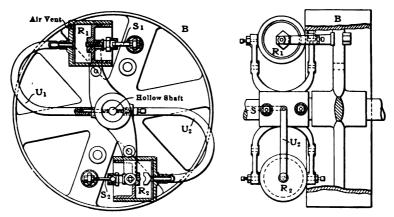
Details of Pistons and Cylinders in Flather's Dynamometer.
